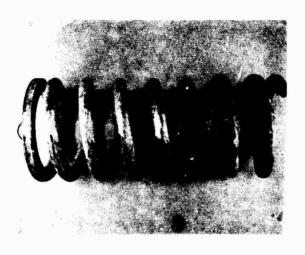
Broken Right Front Spring Three Coils from Bottom On M151A1C after 2459 Test Miles.
